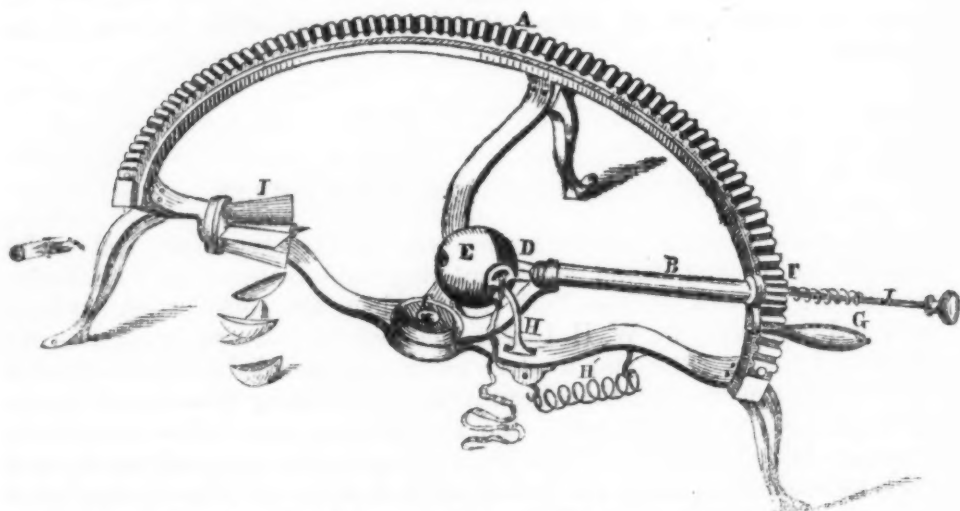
is also a perspective view of the machine on a larger scale, showing the same more clearly.
